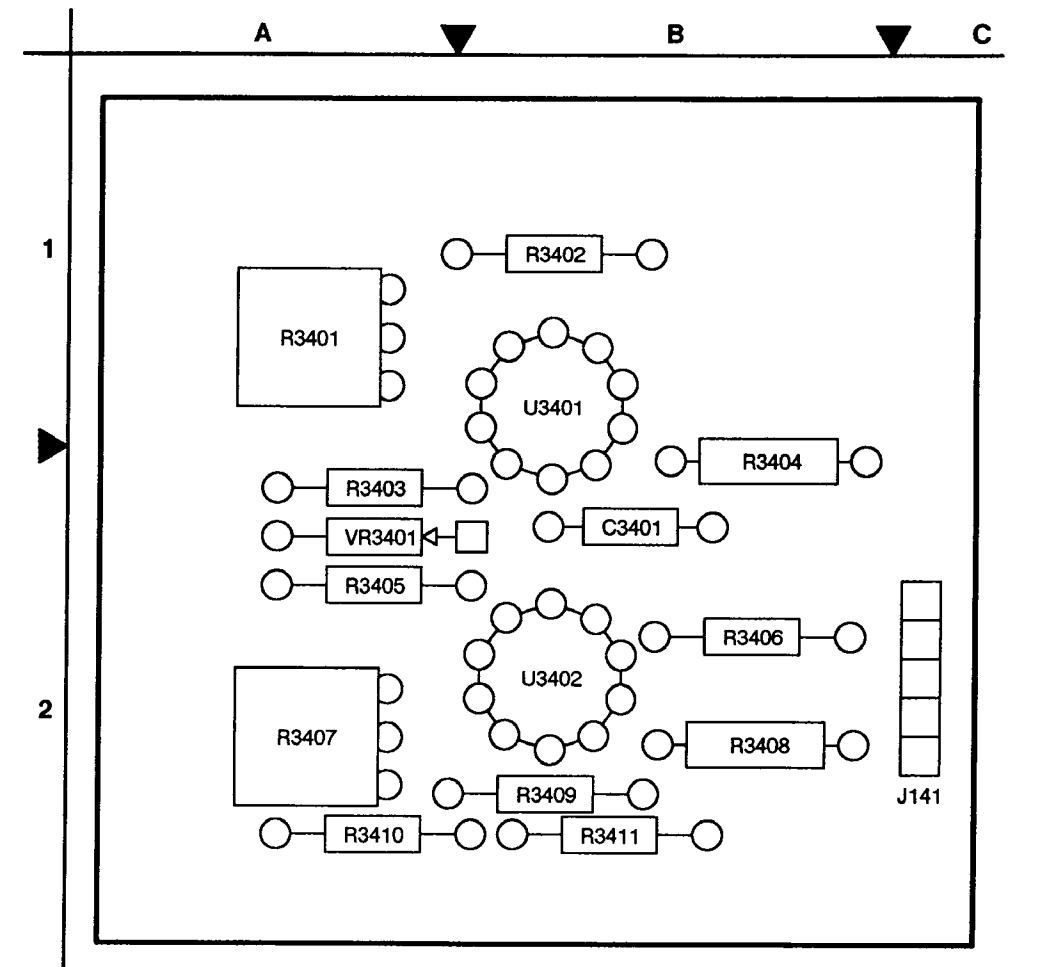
A8 Scale Illumination Board and A14 Dynamic Centering Board Component Locator. FP-23/(FP-24 blank)
